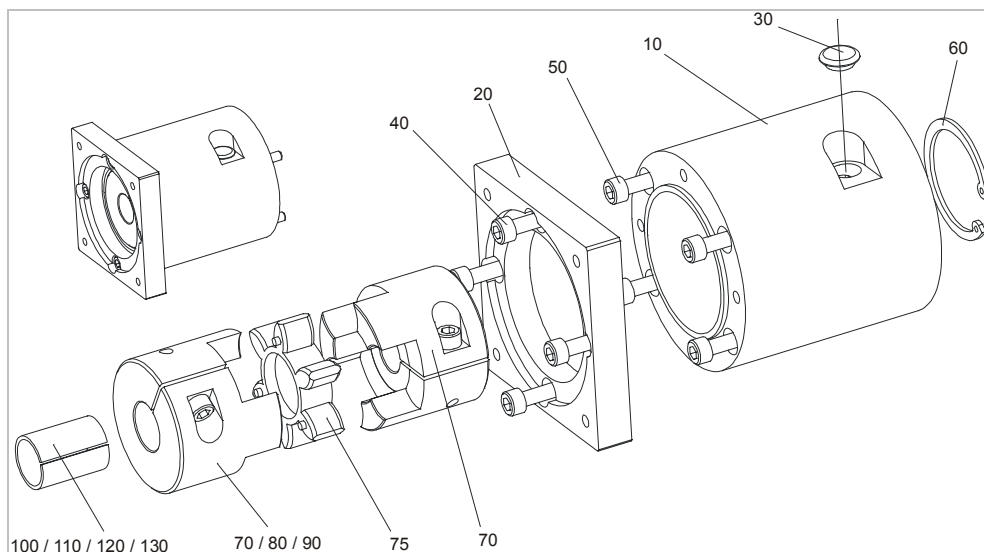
Module 80/15 Flange i=1:1, Part group No. 1000476
